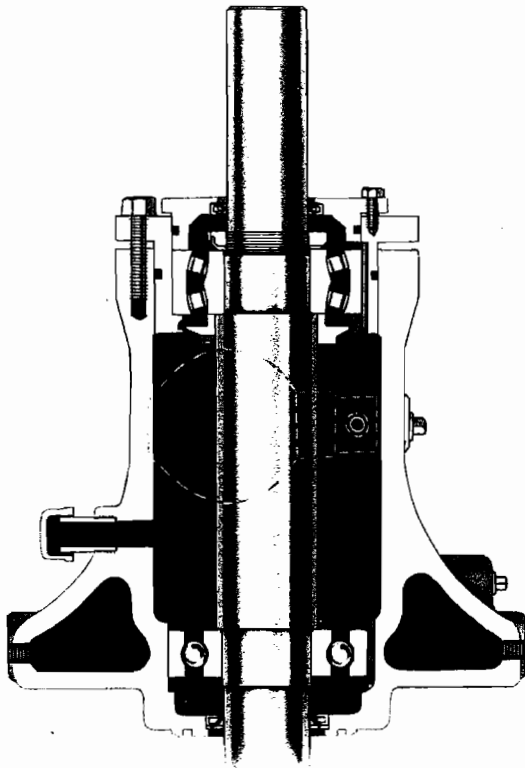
Poorly Designed Bearing Frame Cooling Jacket.
